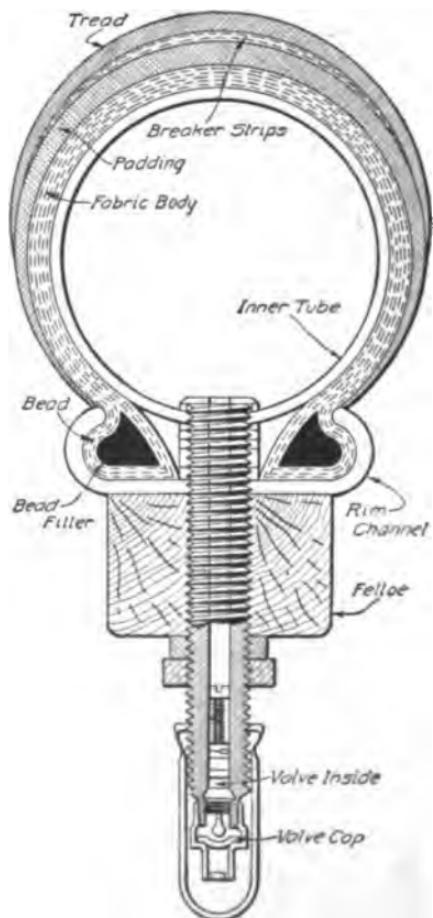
Section through Assembled Tire and Tube, Showing Construction and Parts of the Tire and Tire Valve
